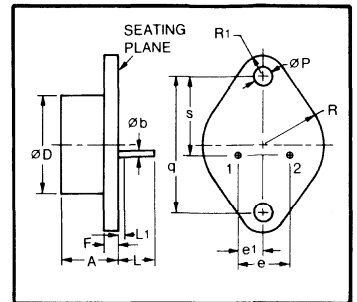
DIMENSIONAL OUTLINE JEDEC TO-204MA (Formerly JEDEC TO-3)
